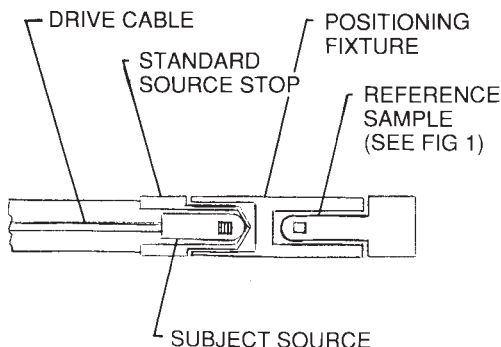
Typical Arrangement Using a Standard Guide Tube and Special Positioning Fixture
